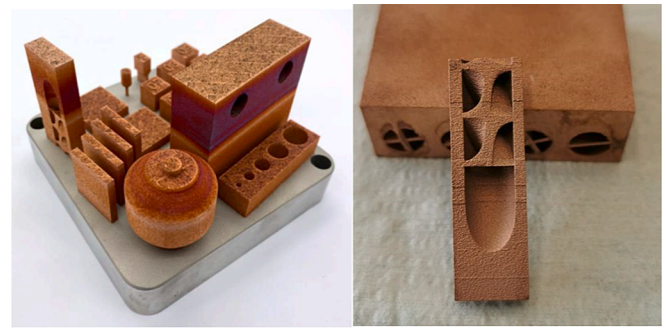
Examples of LBPF manufactured CuCrZr samples (left) and a part of a heat sink containing a  $\varnothing 9$  mm swirl (right).
